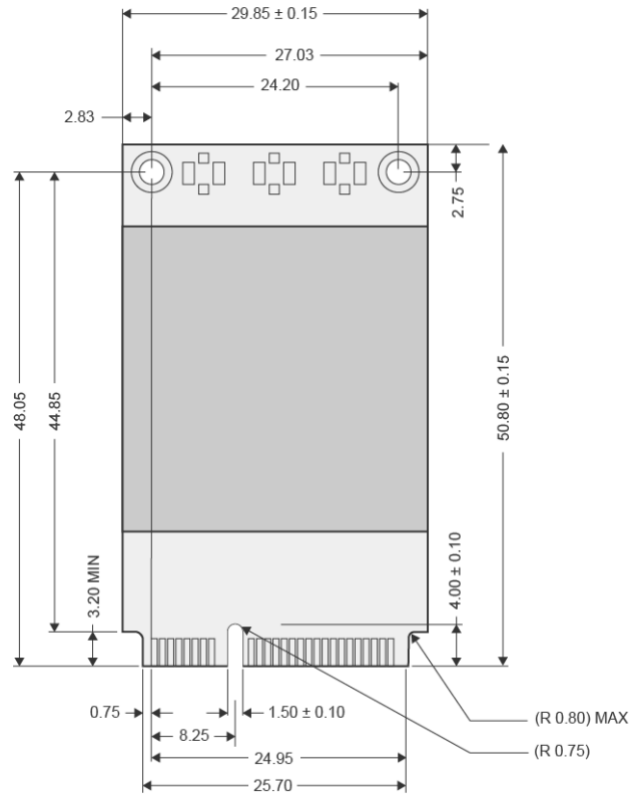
Recommended PCB Packaging of BW1360-PCIE
